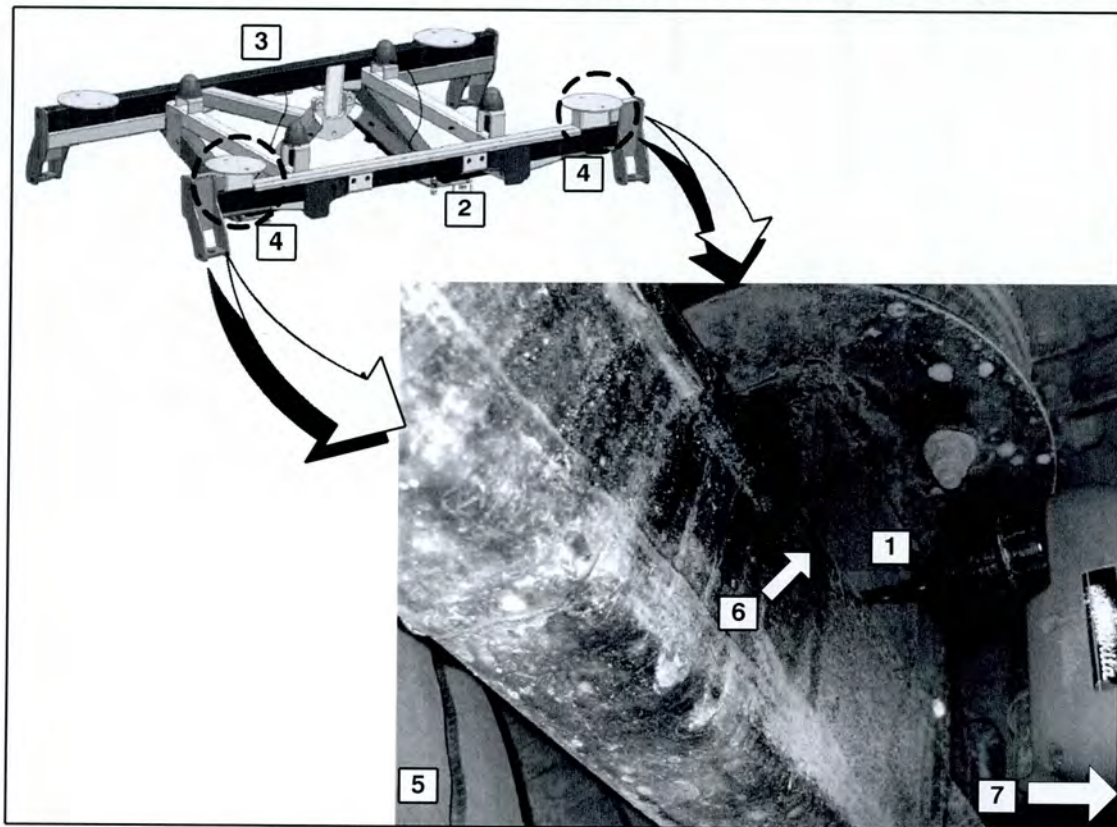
Drain hole drilled in the drive suspension support structure (roadside of coach shown).
